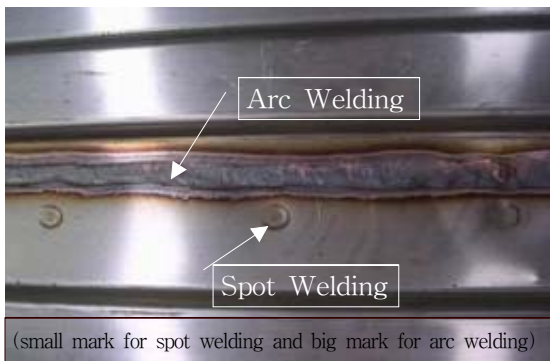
The panel plate and locations for spot and arc welding
